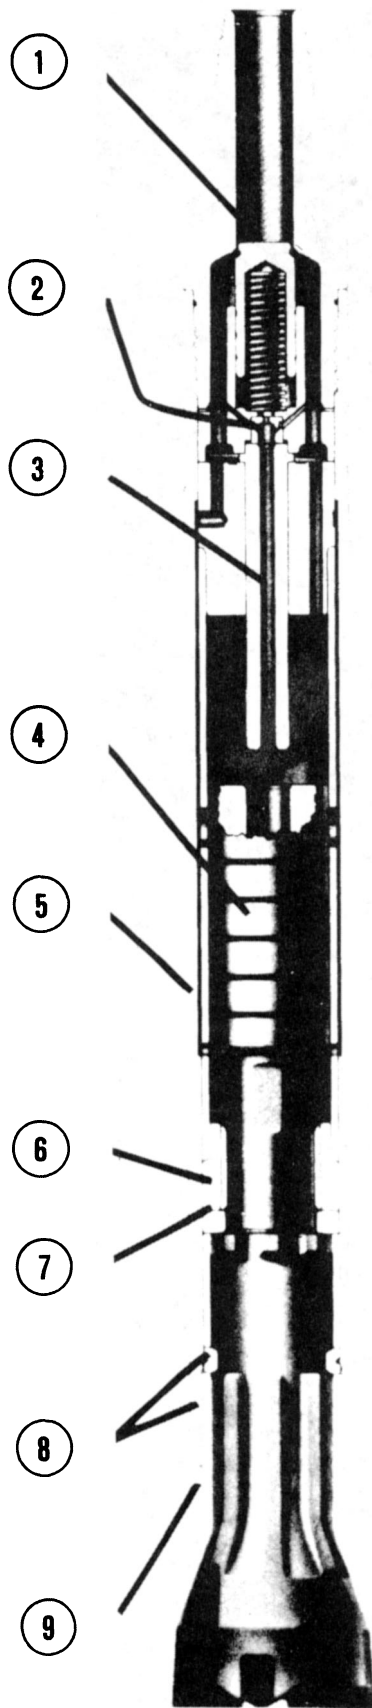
Down-the-hole drill. (1) check valve; (2) air metering plug; (3) air distributor; (4) piston; (5) cylinder; (6) piston-stem bearing; (7) washer; (8) bit retaining ring; (9) splined chuck (from Anderson, 1984).
